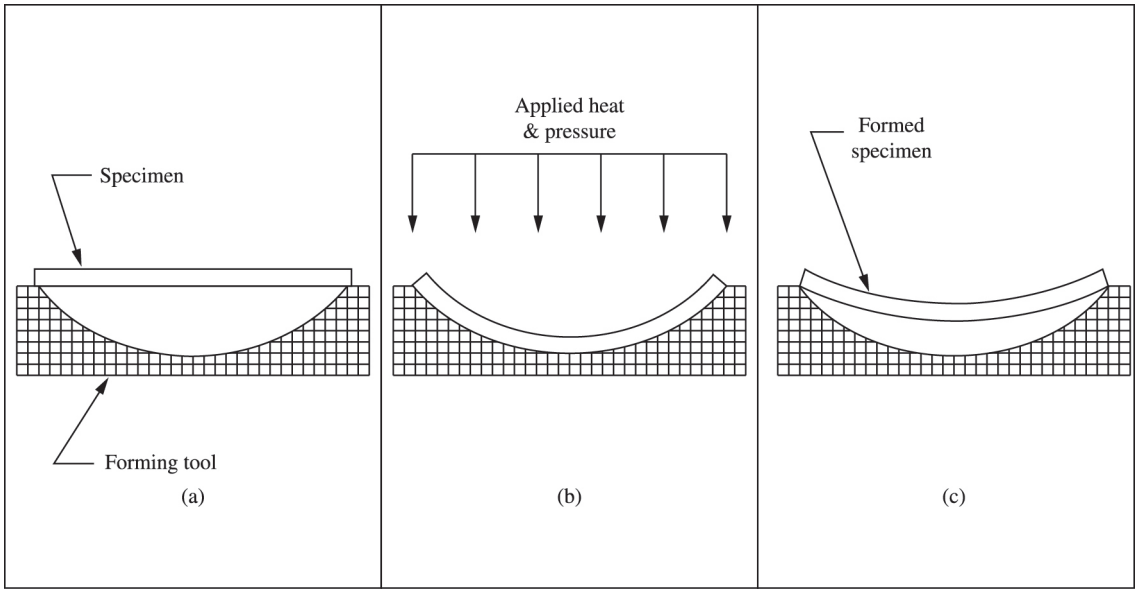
(a) Flat specimen prior to age forming; (b) Specimen reconfigured to assume radius; (c) Dimensionally stable, age formed specimen after experiencing springback⁴.
